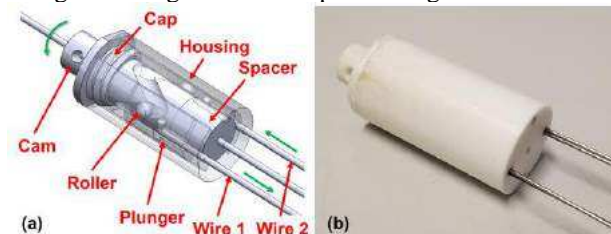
(a) 3D model of inverse barrel cam mechanism (b) Actual 3D printed prototype of inverse barrel cam mechanism
